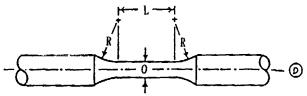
Specimens With Tangentially Blending Fillets Between the Test Section and the Ends
